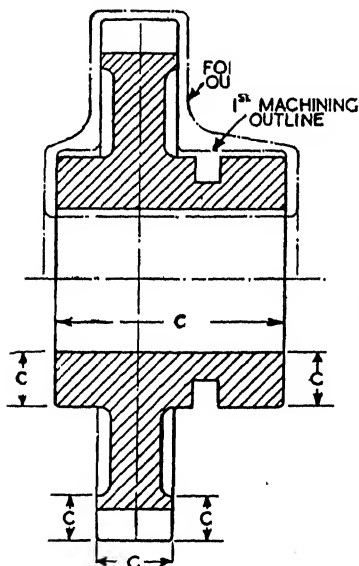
Section of gear-wheel to be heat-treated so that the points marked C will be casehardened. The section also shows the outline of the original drop-forging
